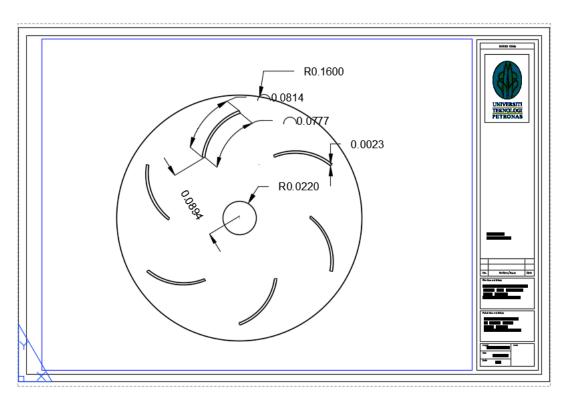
Draft 3 of Cross-Flow Turbine- Top View (using AutoCAD) for DPC Perspex Cutting
